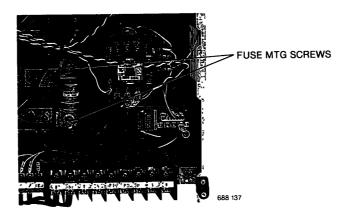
Removing Main Circuit Fuse of Model CIMR-H22D, 400V, 30kVA
